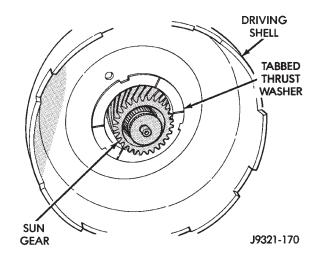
Driving Shell Thrust Washer Removal—46RH
